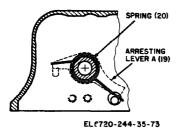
Spring location (spring (20) from fig. 3-15).
